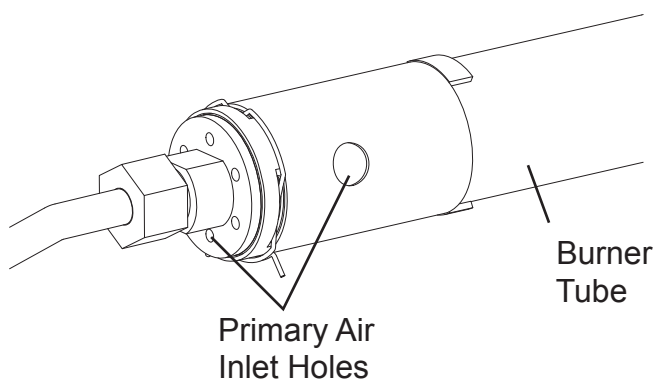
Primary Air Inlet Slot on Burner Tube
